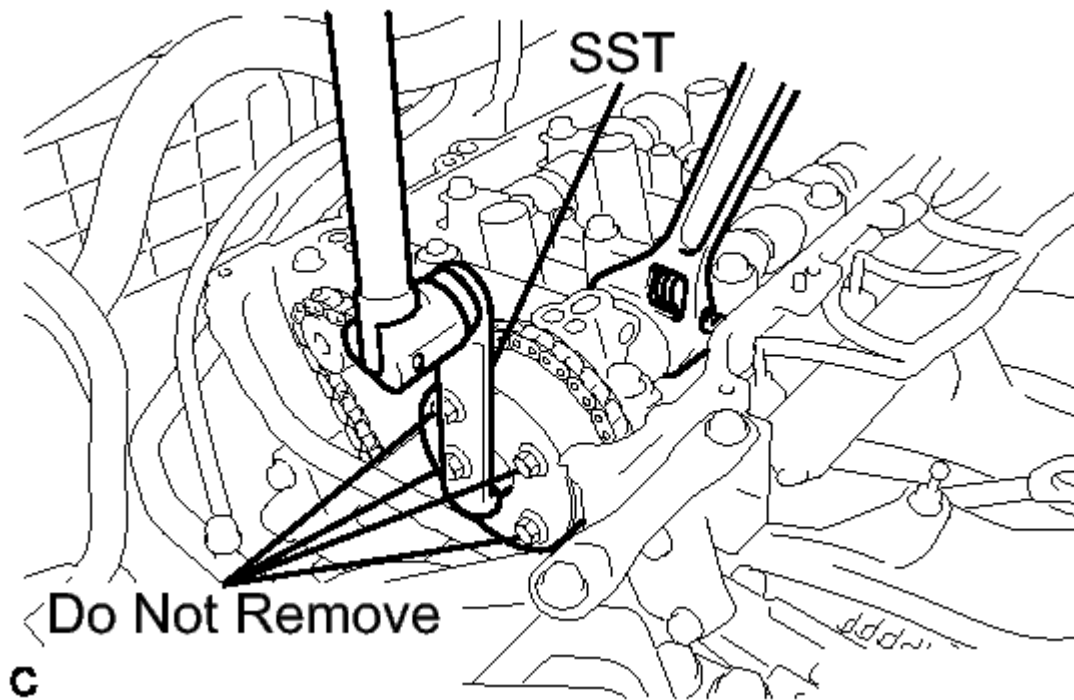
Removing Camshaft Timing Gear Assembly Bolt
